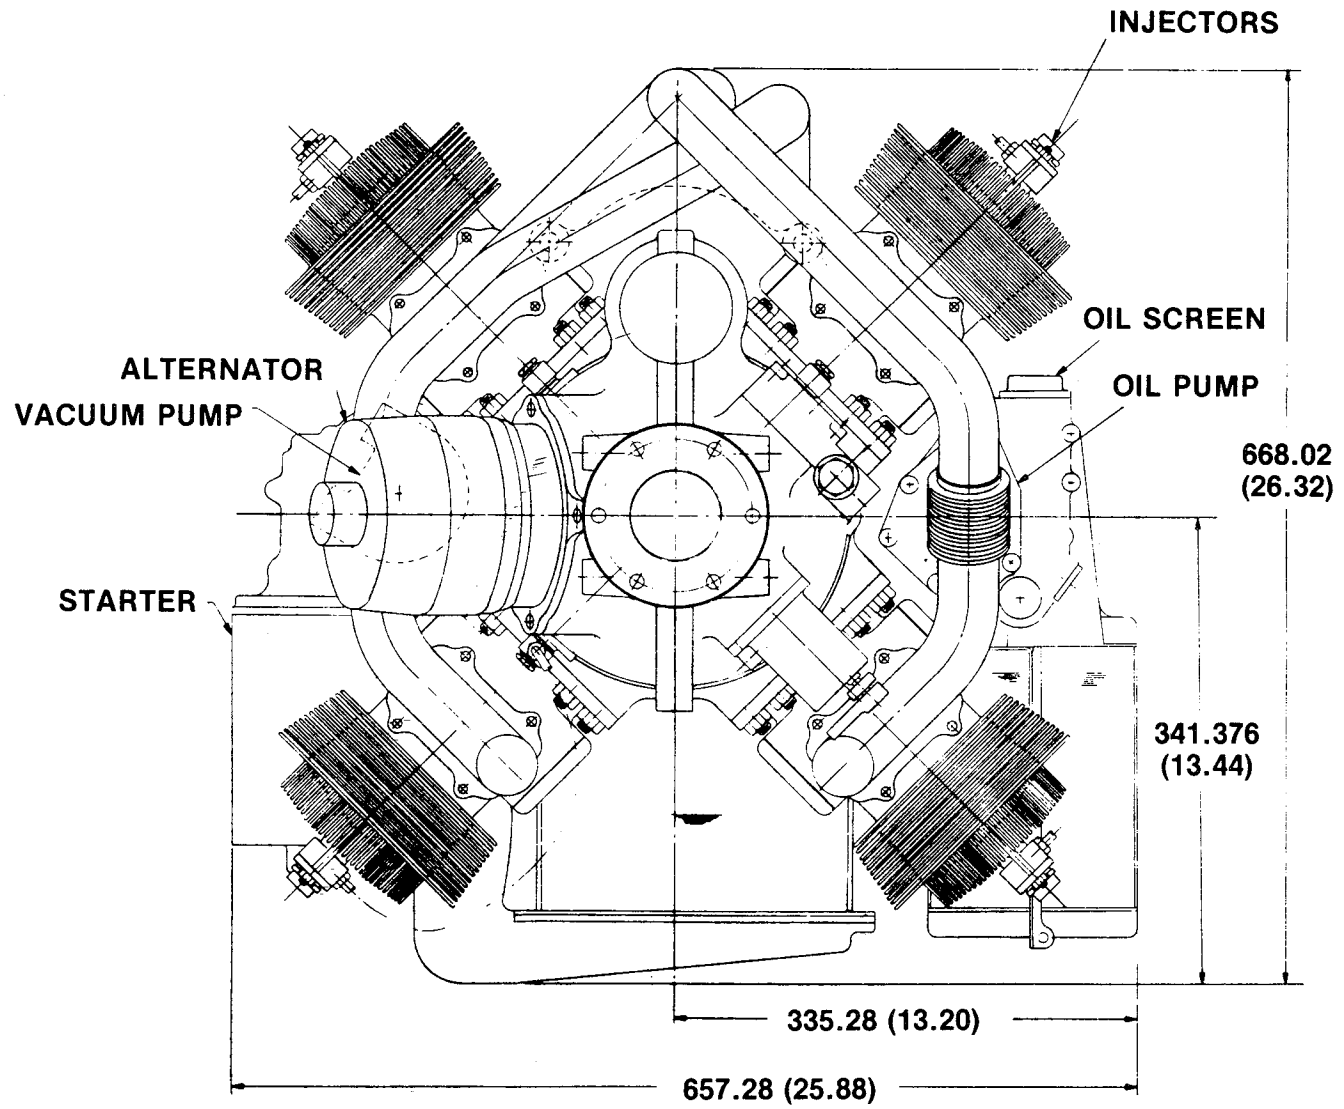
149 kW AIRCRAFT DIESEL—FRONT VIEW
